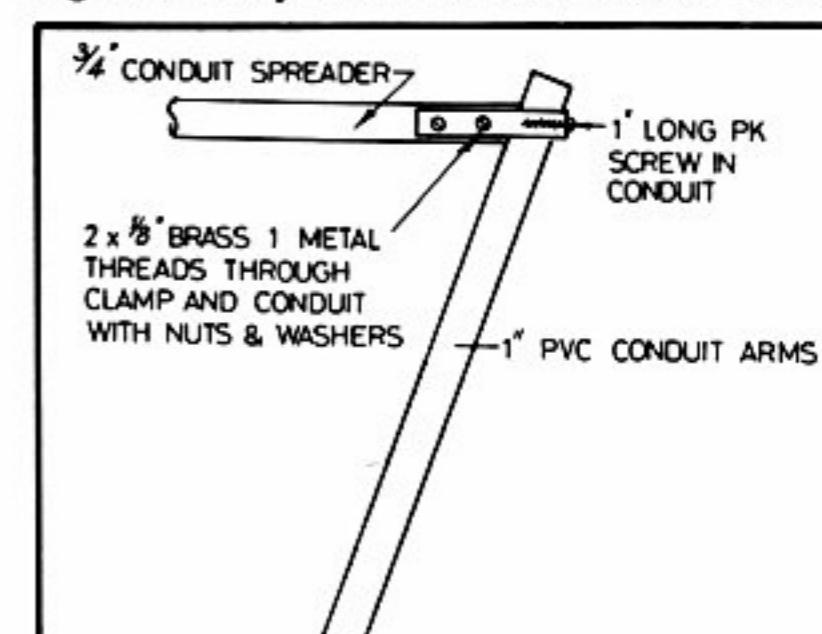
Side view of quad arrangement for clamping PVC conduits together. 24 gauge galv. iron or brass strips for clamps, see Fig. 8.
